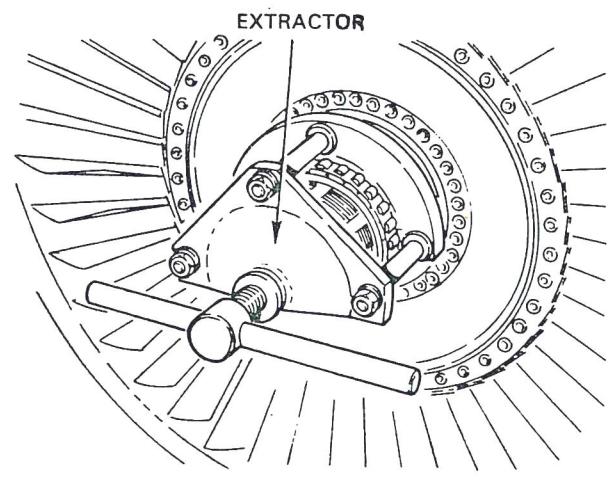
Removing front bearing roller track, adjusting washer and air/oil seal
